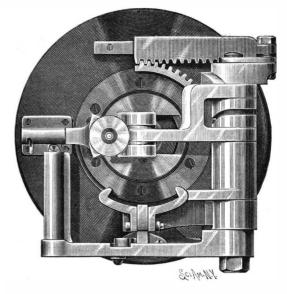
MODIFIED MECHANISM-REAR VIEW OF BREECH CLOSED.
